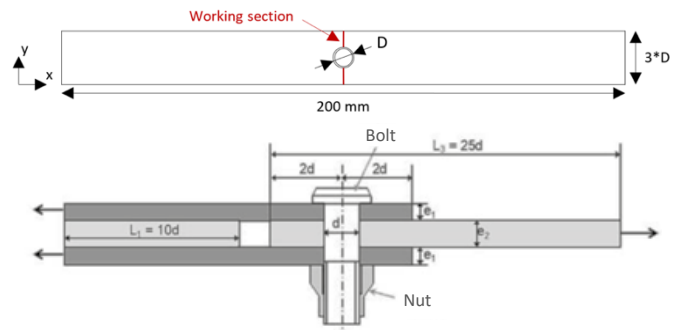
Geometry of the fatigue samples for Open-hole and Filled-hole test.
